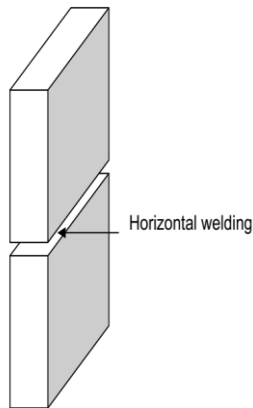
Scheme of placement of components to be welded for horizontal welding
